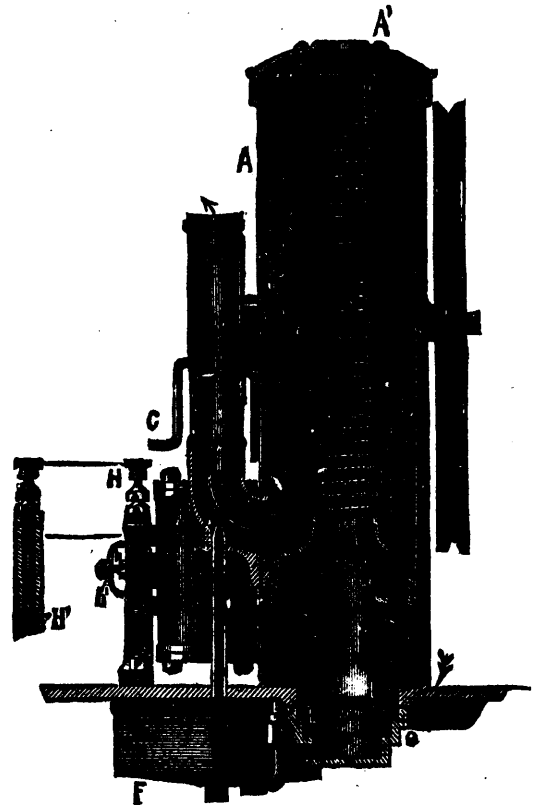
SECTIONAL VIEW THROUGH GENERATOR.
